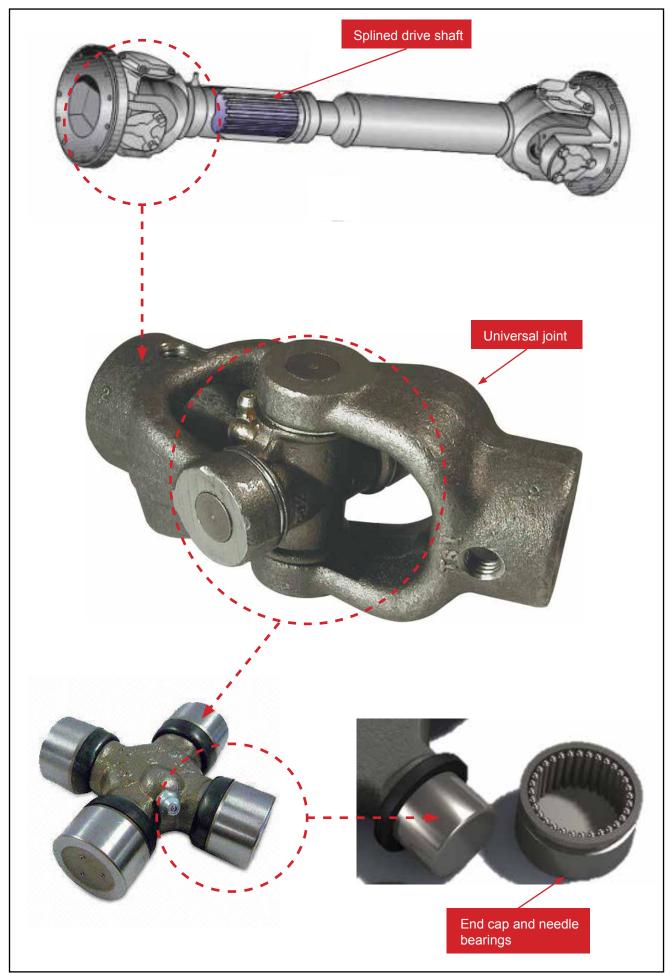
Typical sliding splined drive shaft and universal joint arrangement
